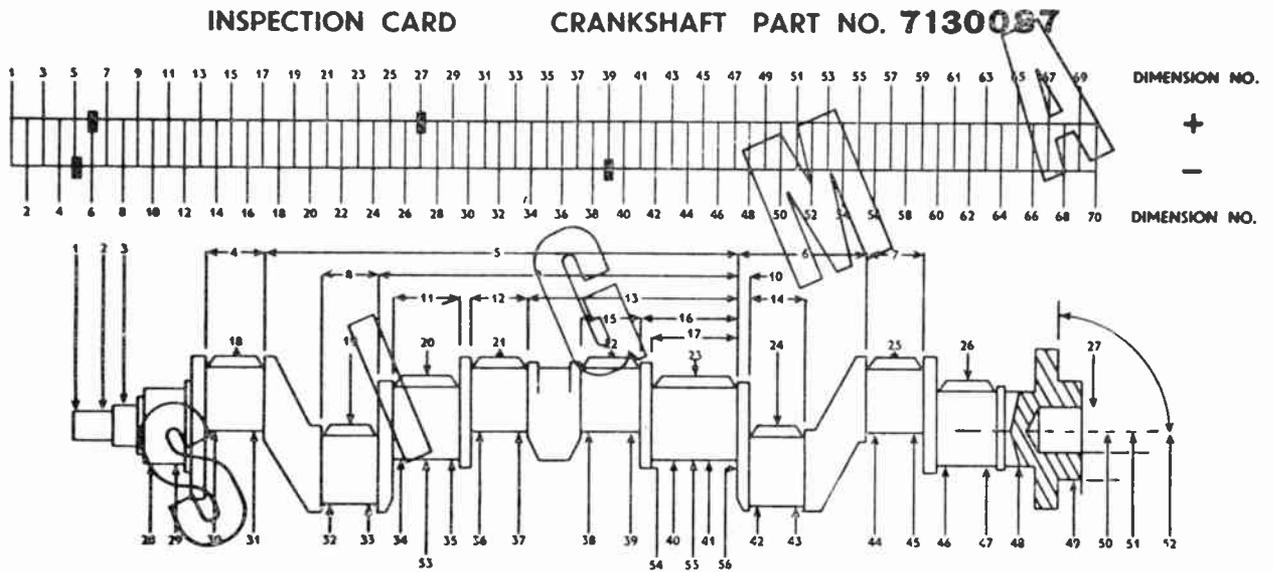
Punched-card certificate (one per each crankshaft) showing deviations from designed limits, produced automatically by the machine system shown in Fig. 2.
